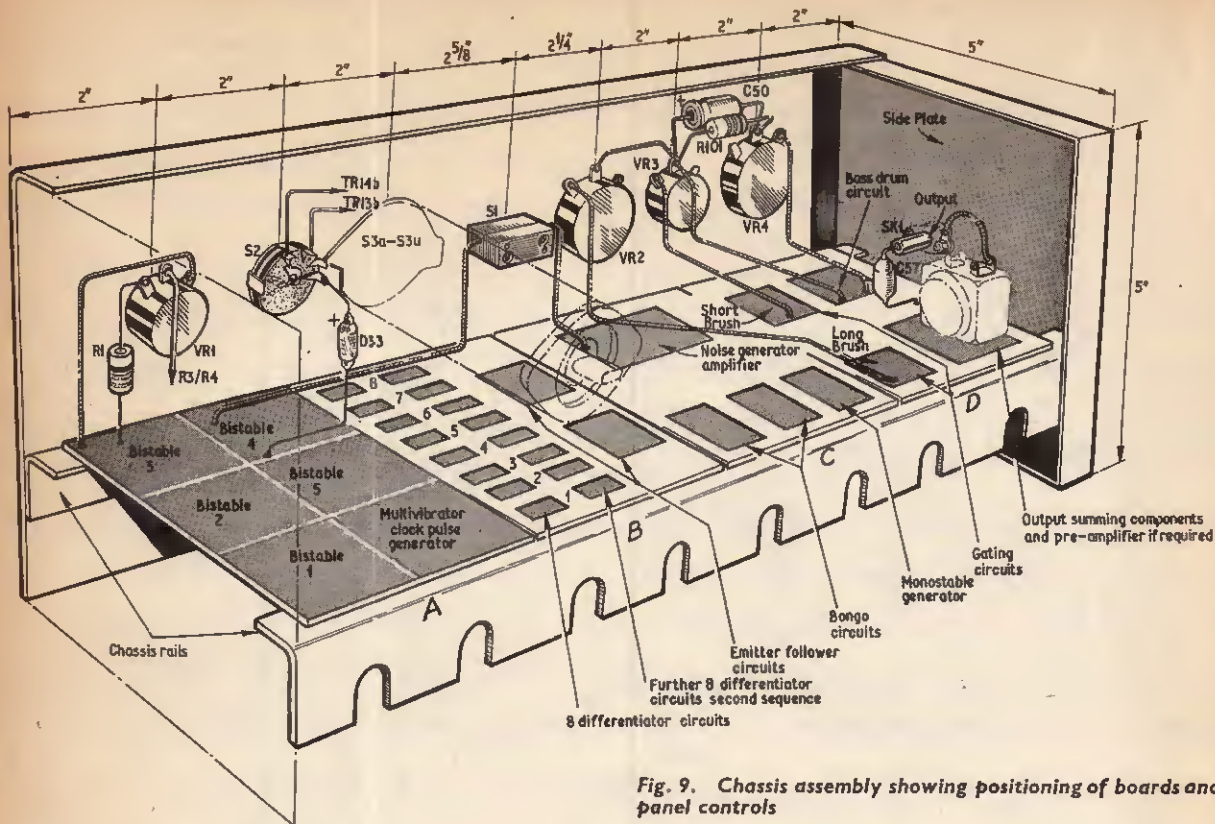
Chassis assembly showing positioning of boards and panel controls
